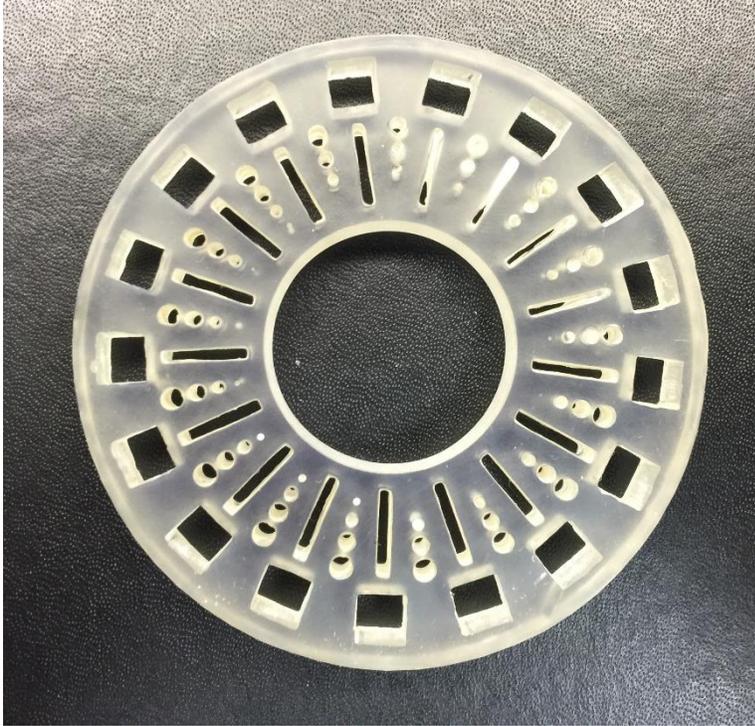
Cage rotor plate manufactured from Clear Resin after wet sanding to translucence.
